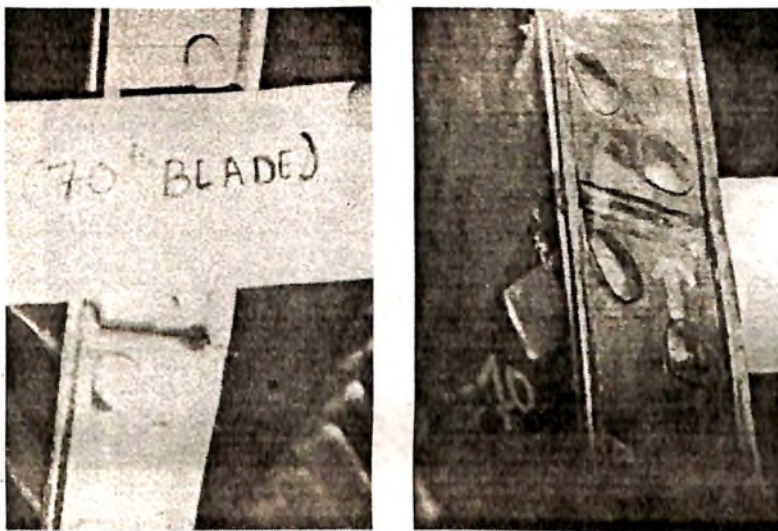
Photographs during dye-penetrant testing of a shroud crack: (a) before repair, and (b) after weld repair.
